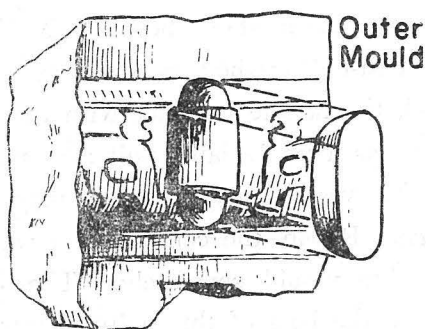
, Mould assembly for the ear of a certain bronze vessel in Yin dynasty.
